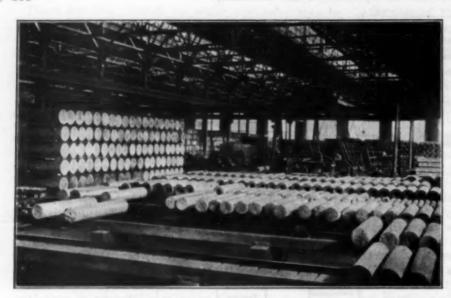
THREADING AND INSPECTION DEPARTMENTS, NIAGARA WORKS, NATIONAL CARBON CO.
